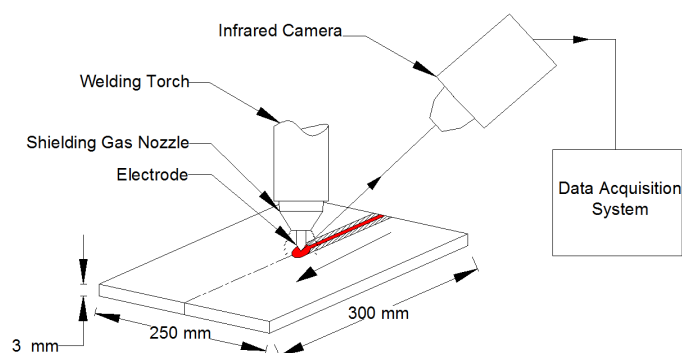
Schematic Sketch of Gas tungsten arc welding process with an IR camera
